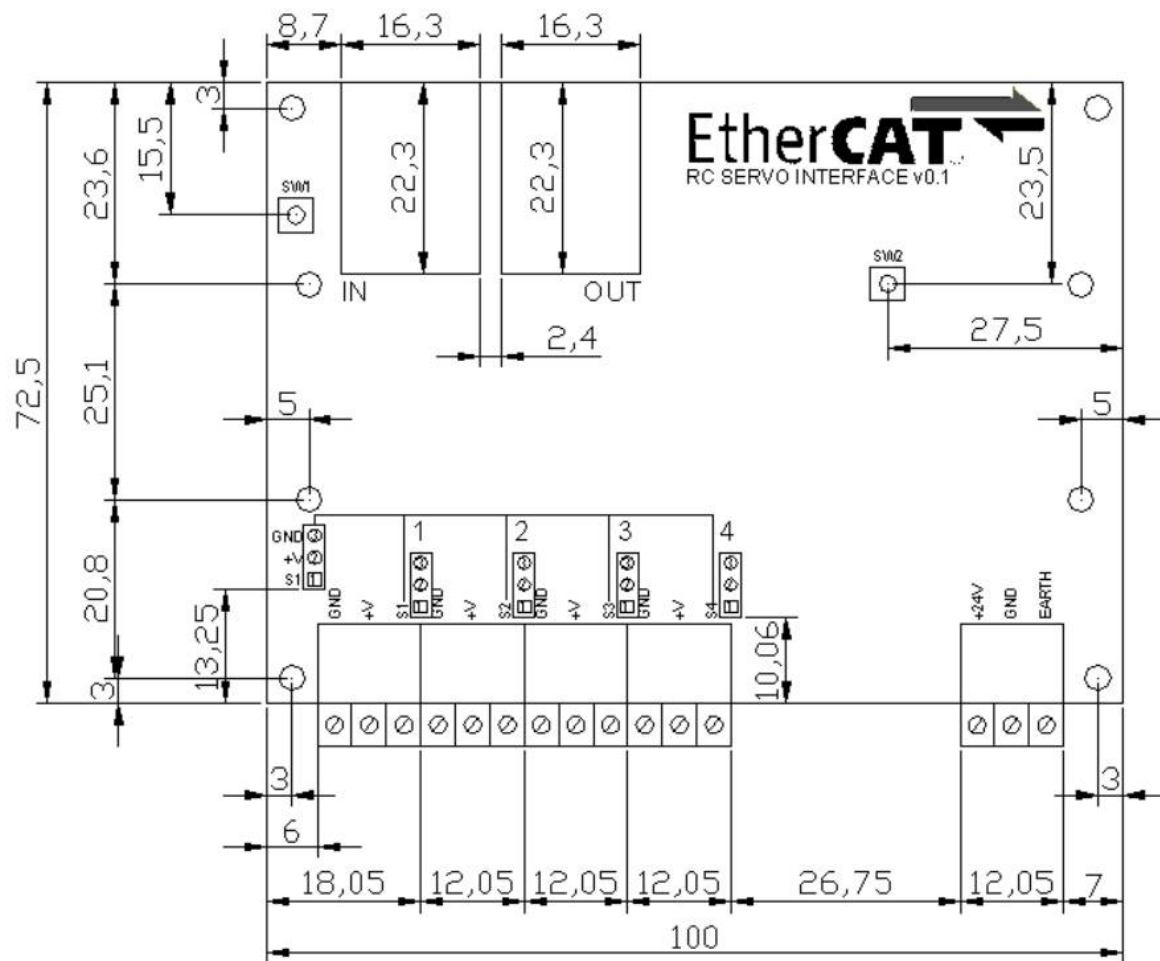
Outline dimensions in mm (alltolerances : +0.5mm)
